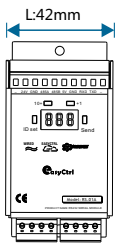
Dimensional Drawing - Front View Figure 3. Dimensional Drawing -Sideview
